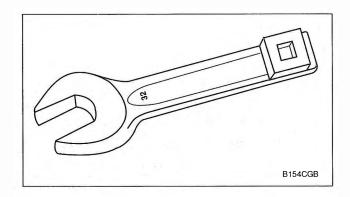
Special 32 mm open end wrench (BMW Part No. 11 5 040).
